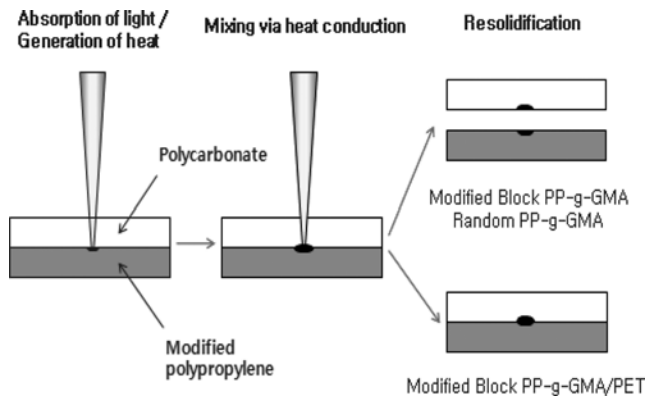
Laser welding of modified PP(with carbon black) and PC.
